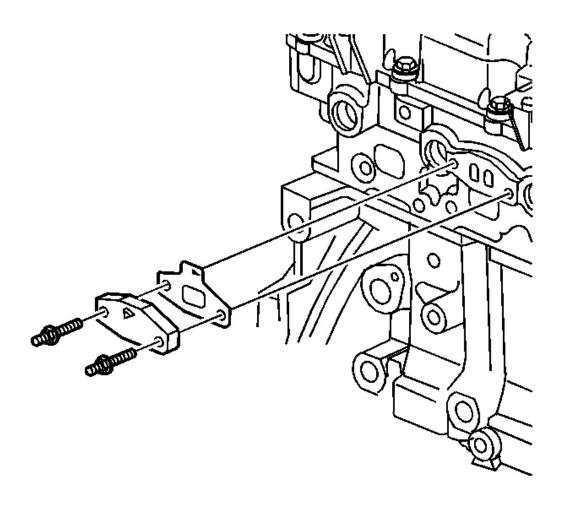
View Of A.I.R. Injection Pipe Cover Courtesy of GENERAL MOTORS CORP.
